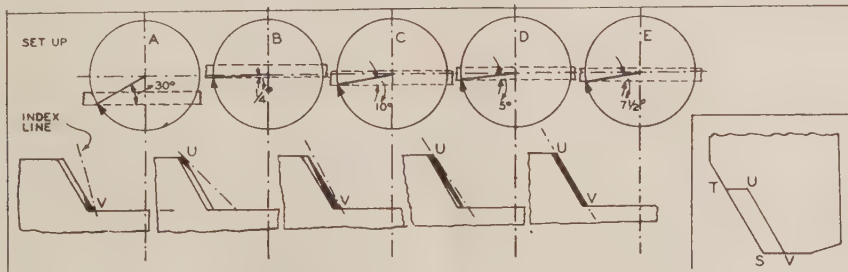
SETUP OF CUTTER AND WORK USED IN TOOL-WEAR TESTS
